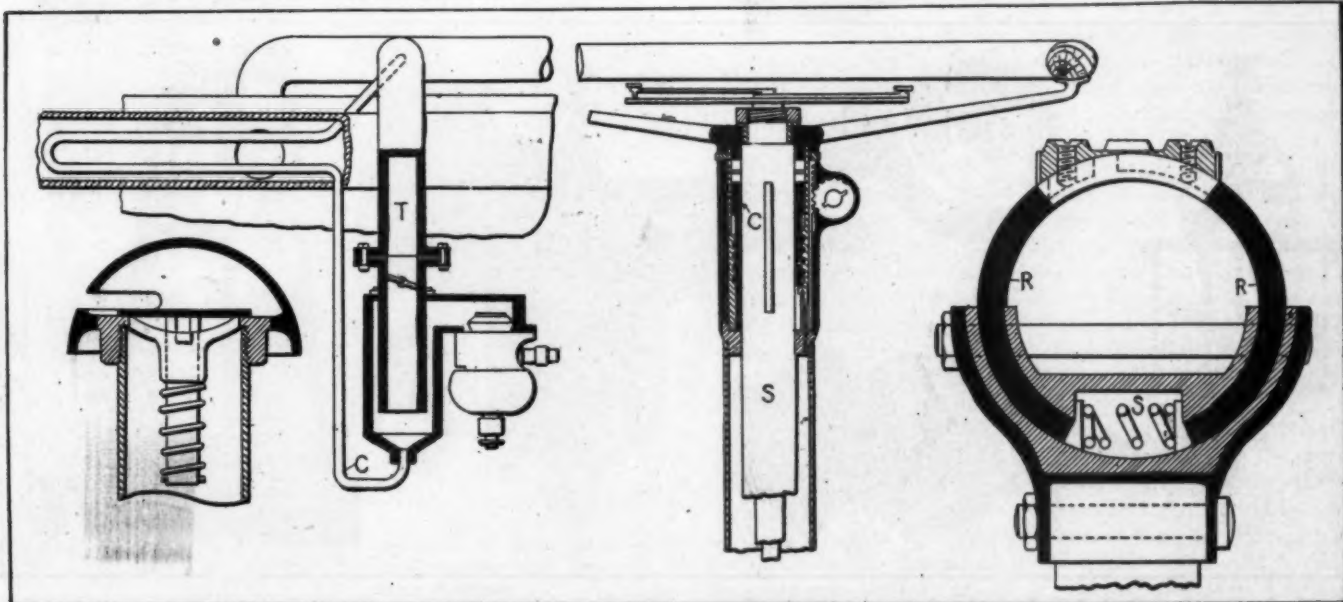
Gaydon muffler. Fig. 2—Stewart carbureter. Fig. 3—Stanley steering wheel lock. Fig. 4—Seelig tire
